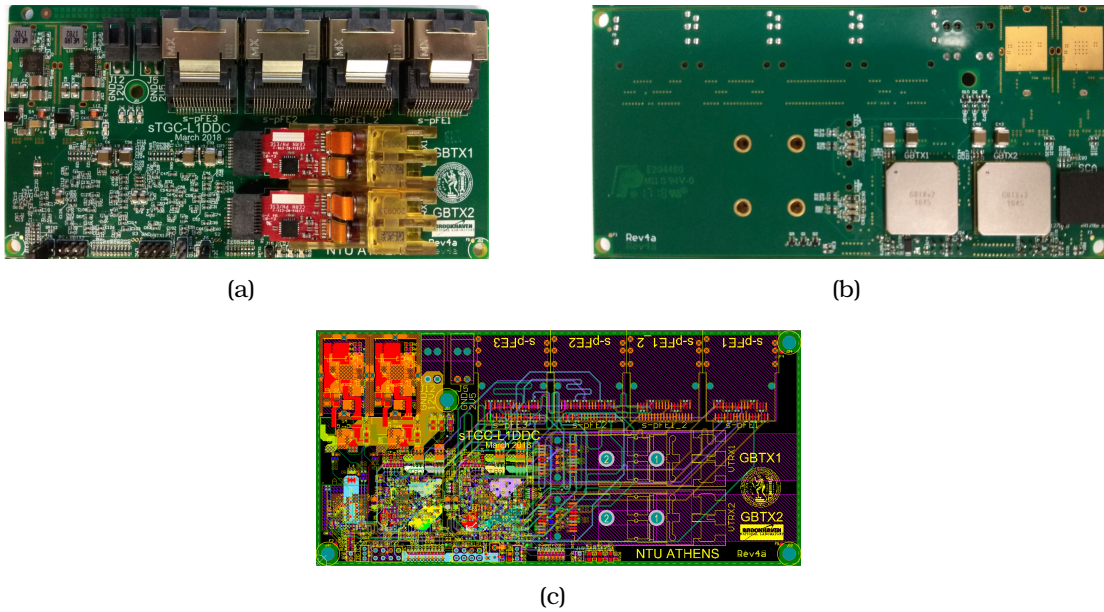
sTGC-L1DDC Prototype-4 board, (a) top side, (b) bottom side and (c) layout.
